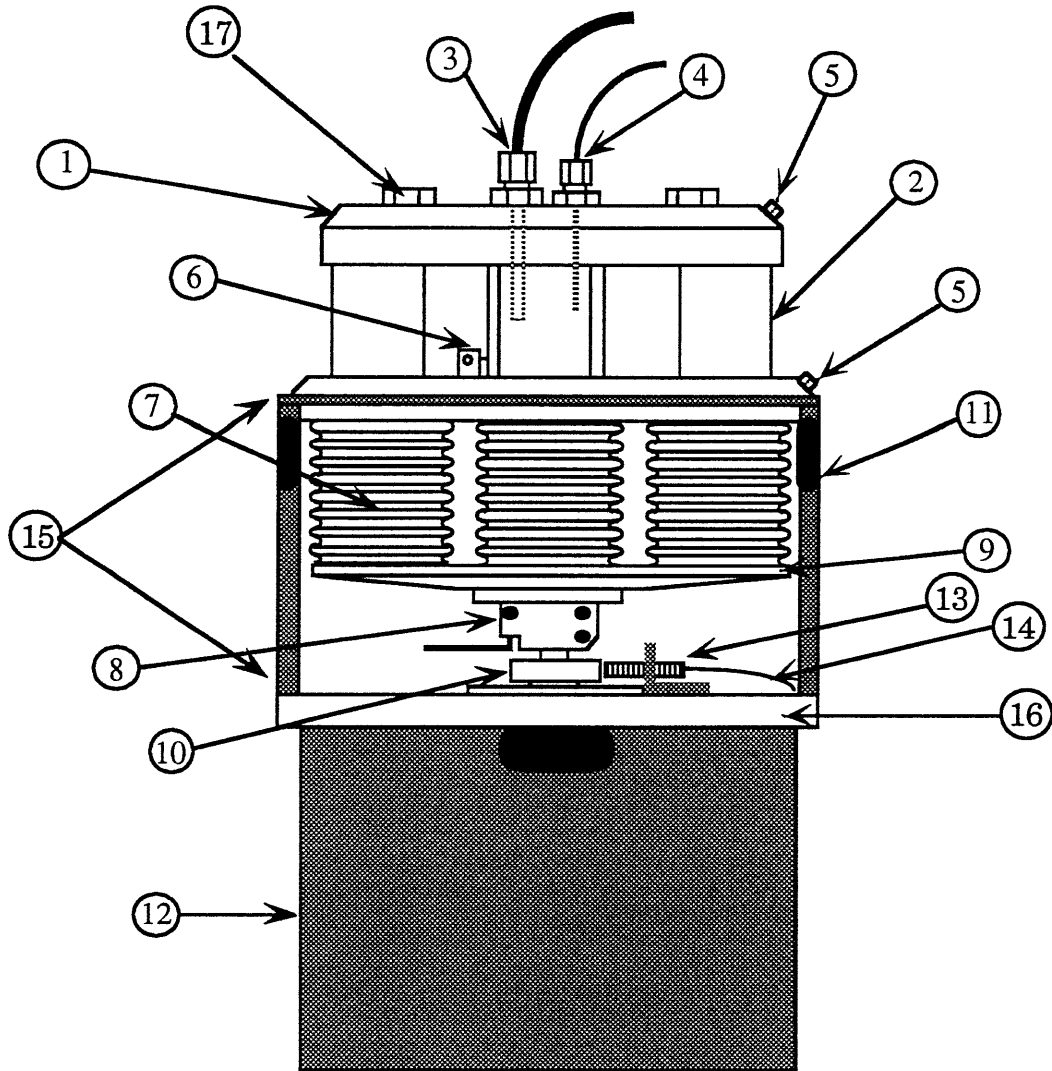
B - Machine with Two Sectors Removed To Show Swashplate Tilt Coupling and Jack Screw Wrench
